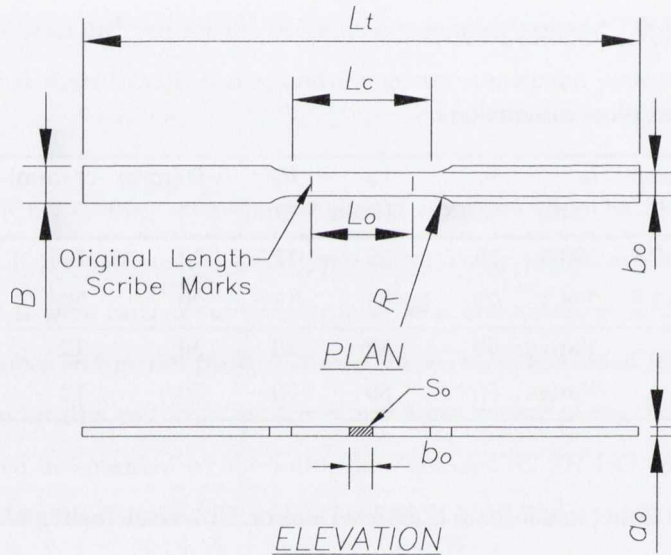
Machined test piece dimensions for rectangular cross sections.
